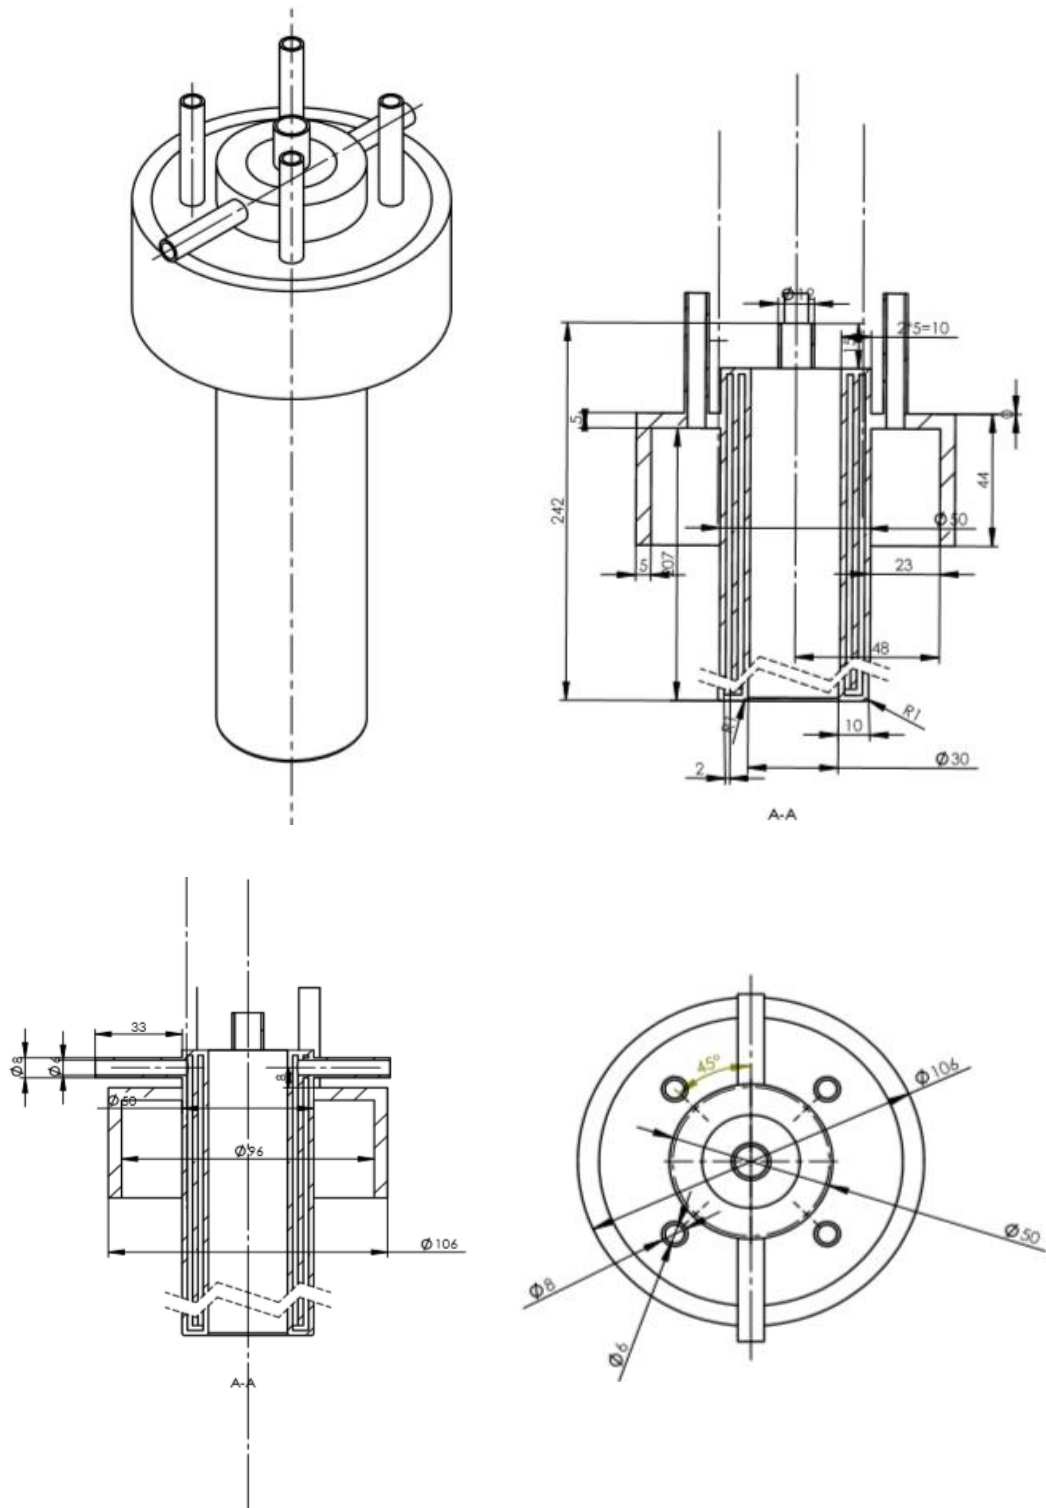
Technical draw of the injector – part 1 (dimensions are in mm).
